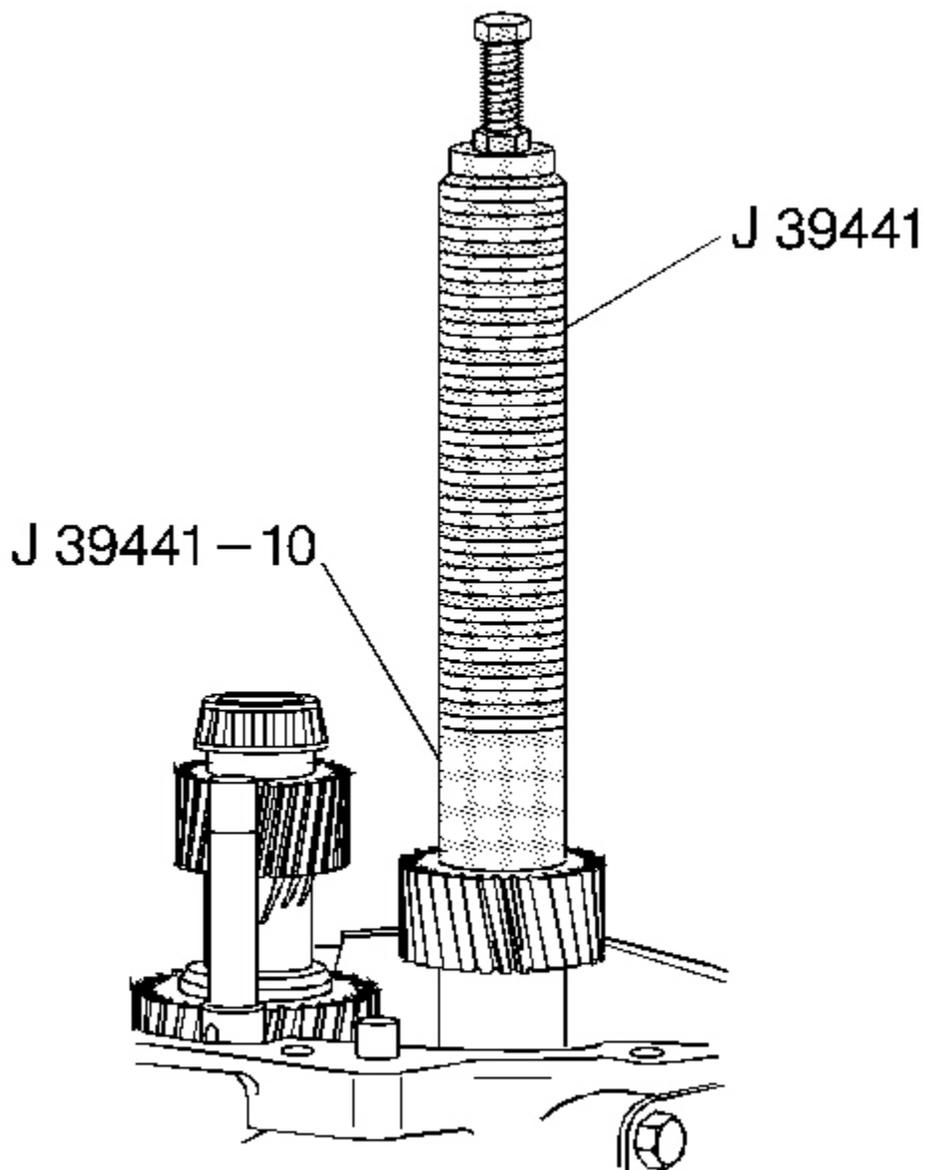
Installing 5th/6th Speed Driven Gear Using J 39441 & J 39441-10
